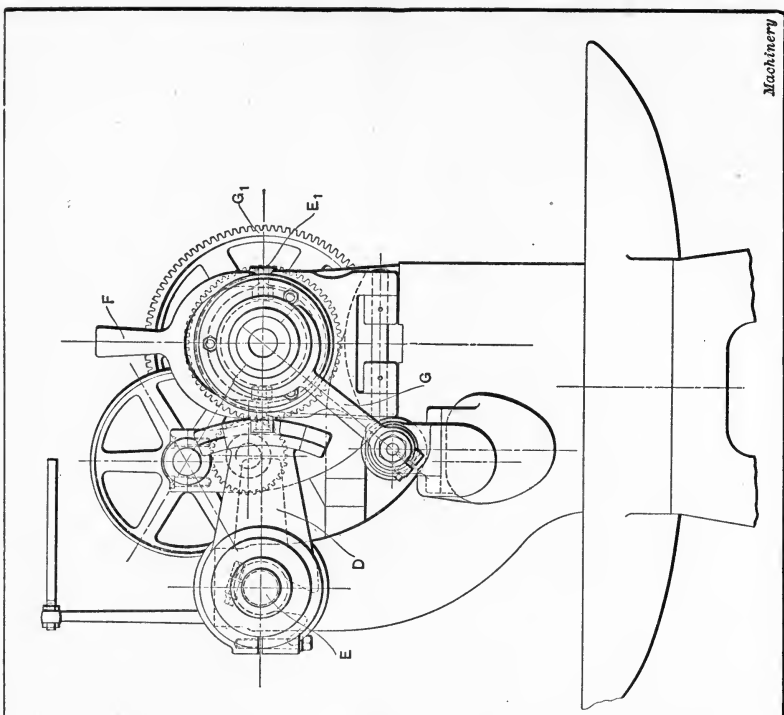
End Elevation showing Chuck-closing and Stock-feeding Mechanism
